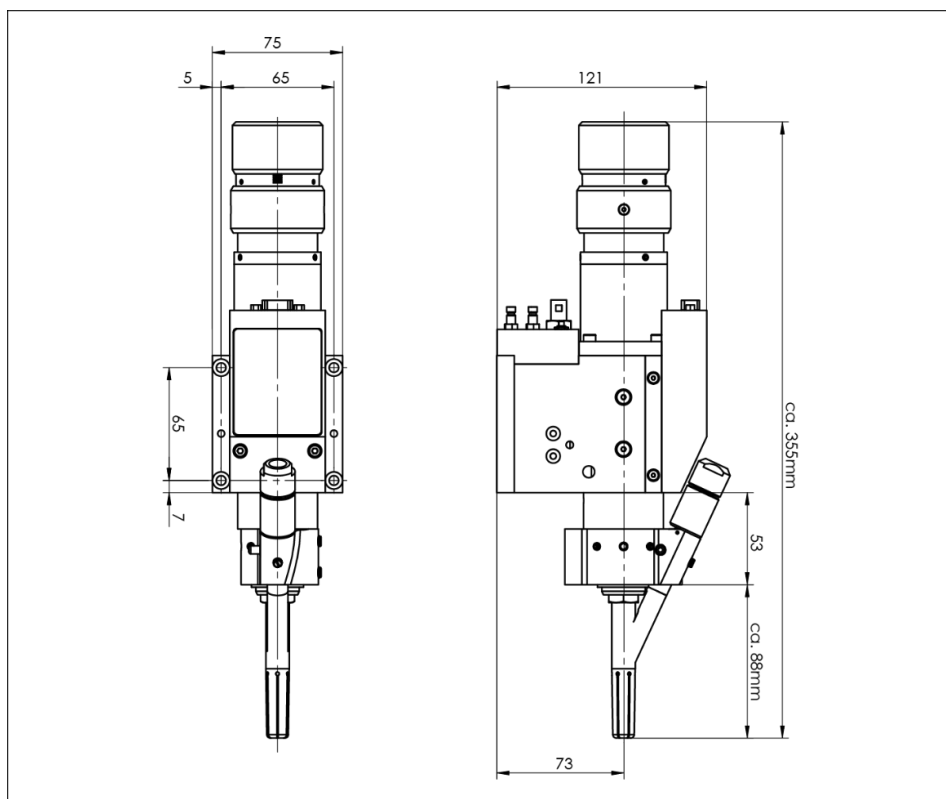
Dimensions of SK-5AP/KS stud welding head
